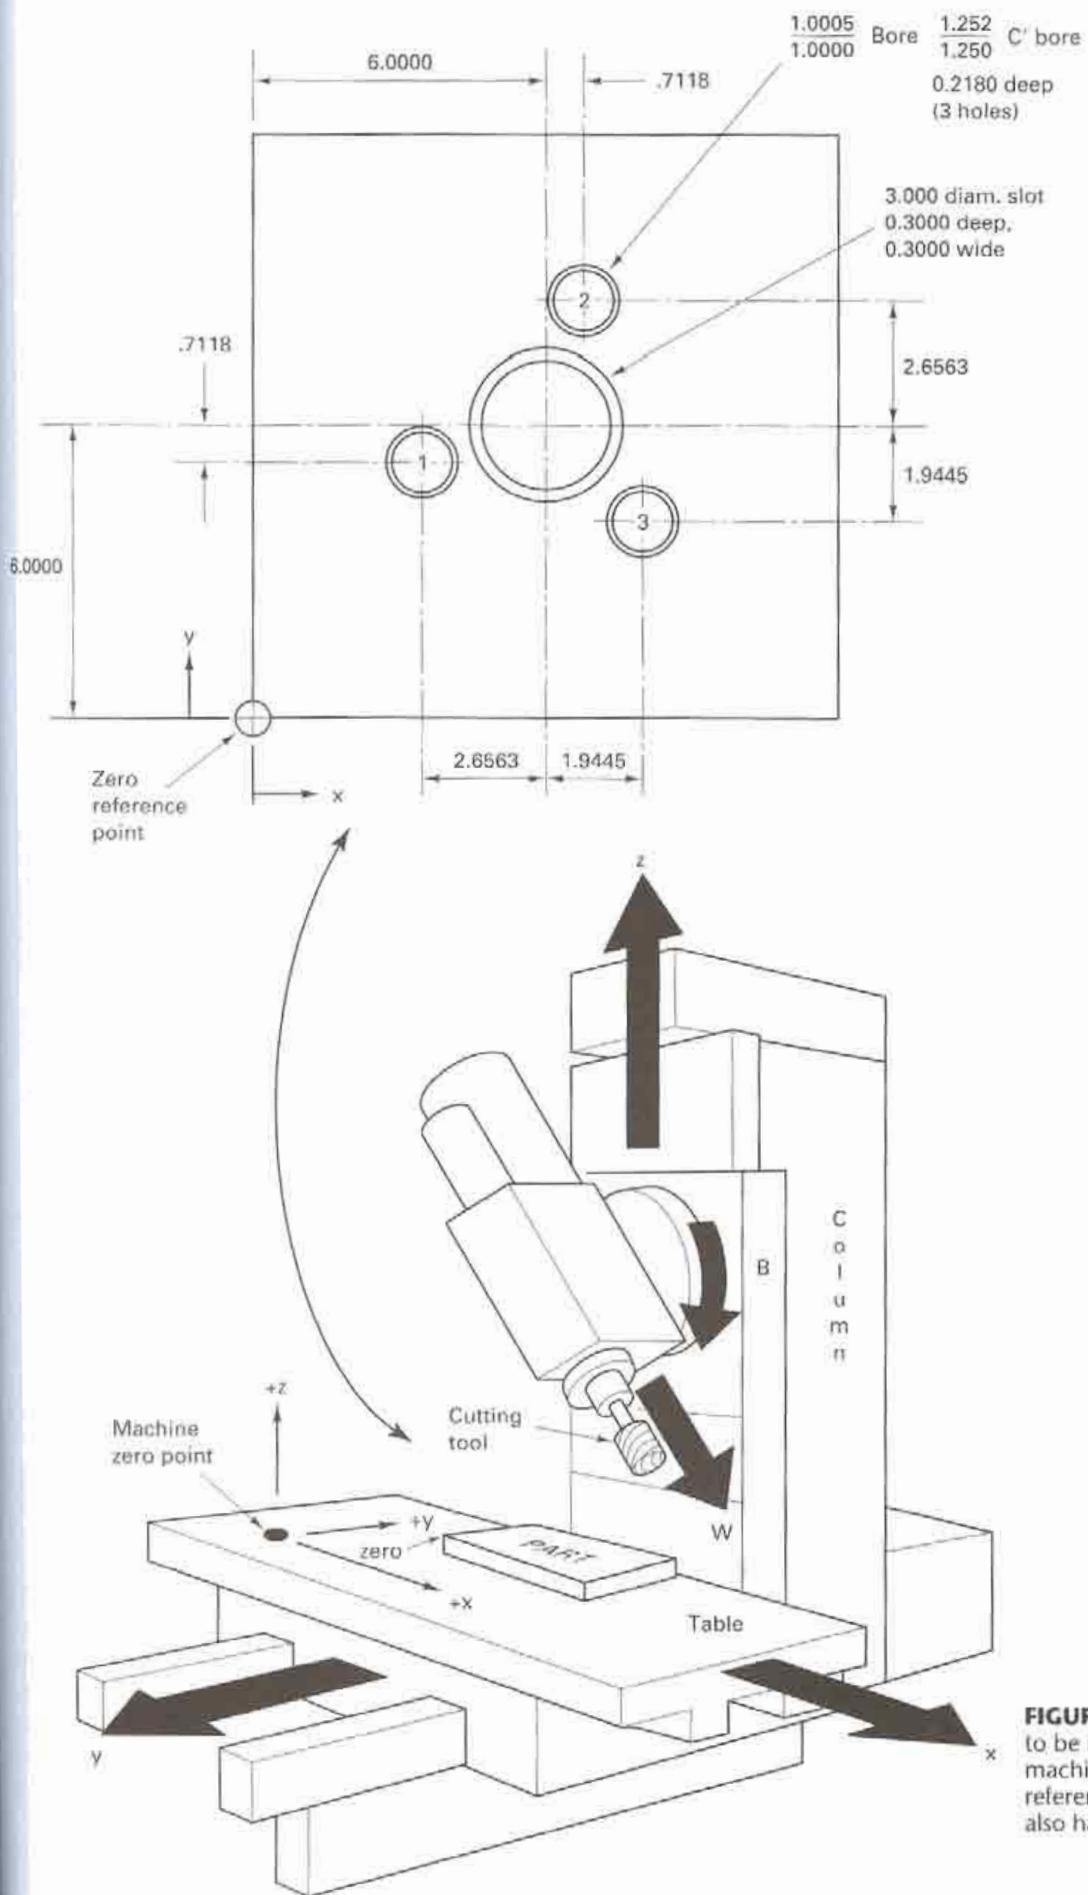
The part (above) to be machined on the NC machine (below) has a zero reference point. The machine also has a zero reference point.
